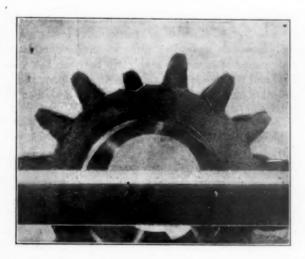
End View of Pinion Shown in Fig. 3, Showing Cracked Teeth
